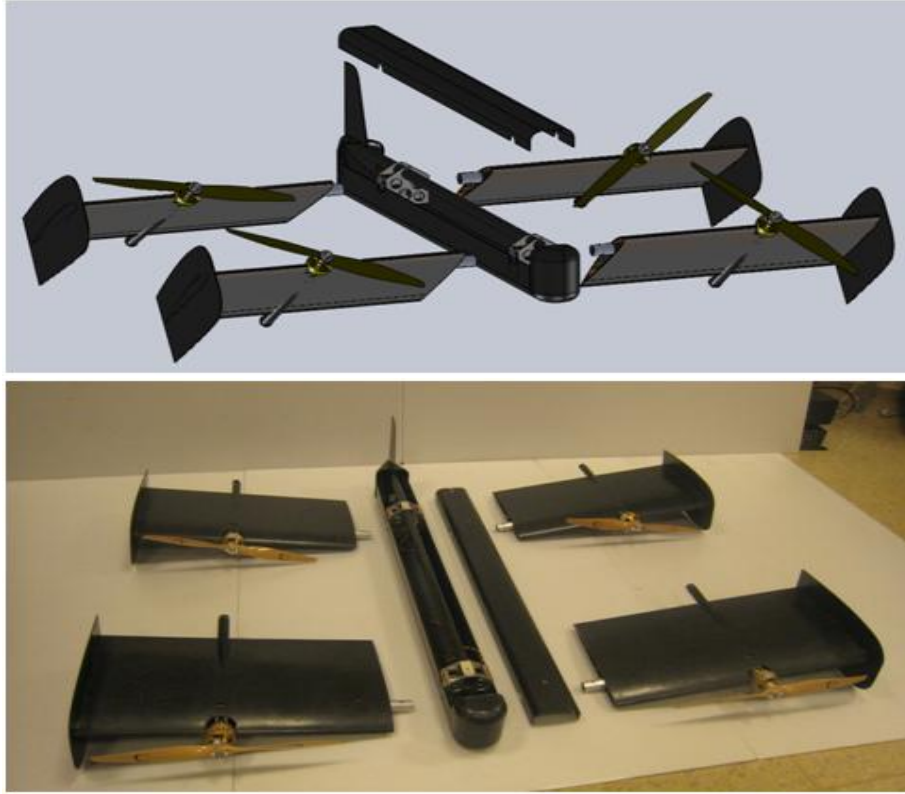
CAD drawings of parts of the aerial vehicle and prototyping
